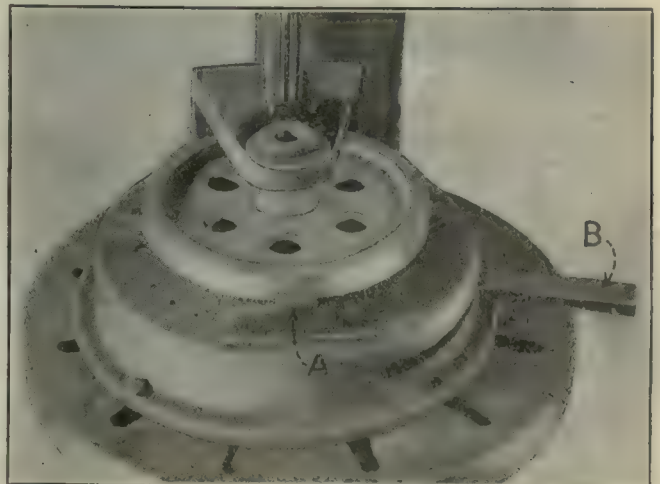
JIG FOR CENTERING GEAR WHEEL
